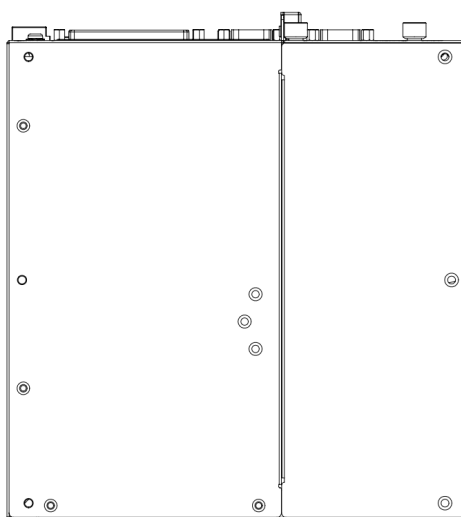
MXC-3340 mechanical dimensions (Bottom view)
